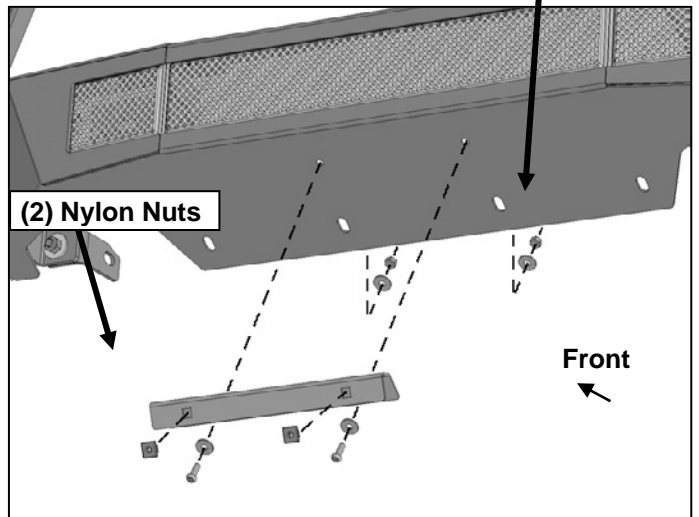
Attach Support Bracket to bottom hole in Bumper mounting plate on back of Bumper
